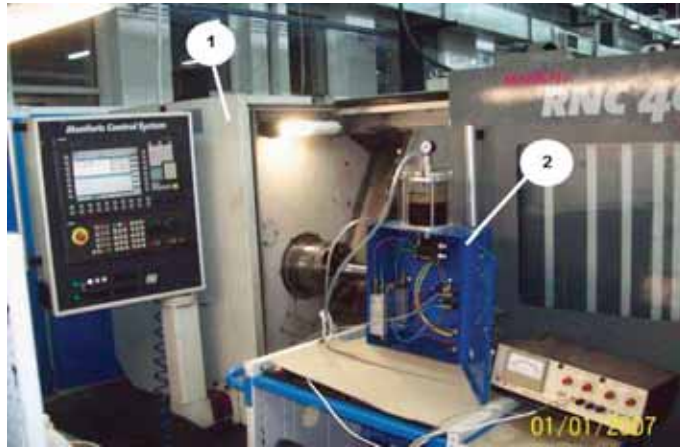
Workplace, 1- machine, 2- Minibooster II oil fog generator
